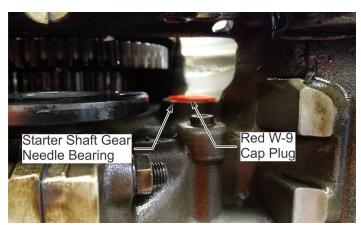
Cap the Starter Shaft Gear Needle Bearing
